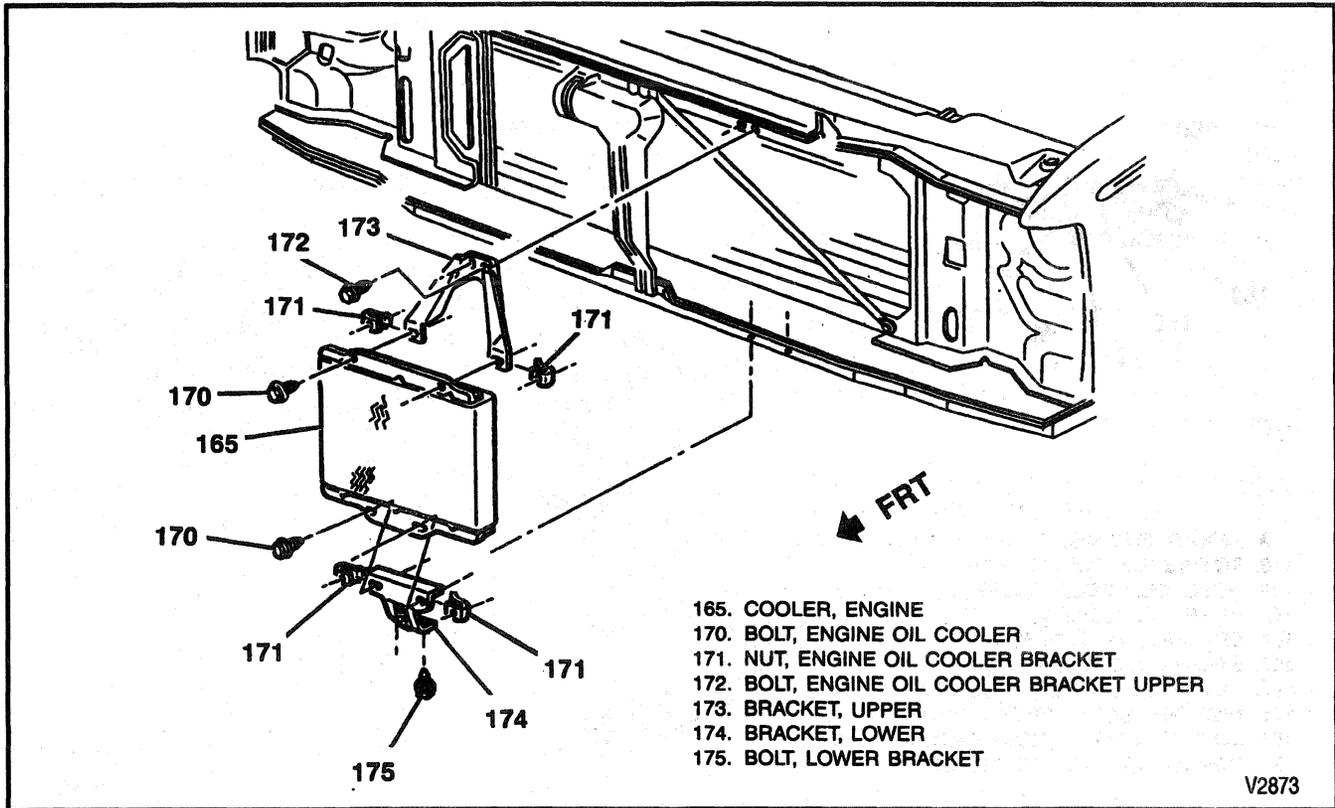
Engine Oil Cooler Assembly (Diesel Engines)
